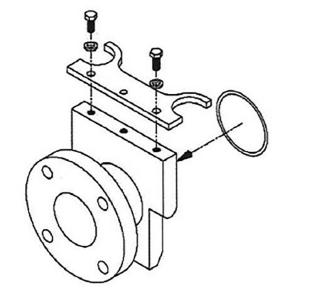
shows all the parts included with the pullout flange assembly. This is the removable portion of the base elbow rail system assembly, and it is this assembly that will attach to the discharge of the pump (see figure 2). The threaded pump adapter flange will thread into the pump discharge as shown. The pump adapter flange is secured by tightening the two (2) long cap screws provided. This allows the pump to be oriented as necessary before lowering into the basin or collection tank. After attaching the pull out flange assembly to the pump, the lifting chain or cable assembly should be attached (see figure 3). This should be adequately sized to handle the weight of the pump and the pull out flange assembly as well as be long enough to allow for easy access for pulling the pump.
